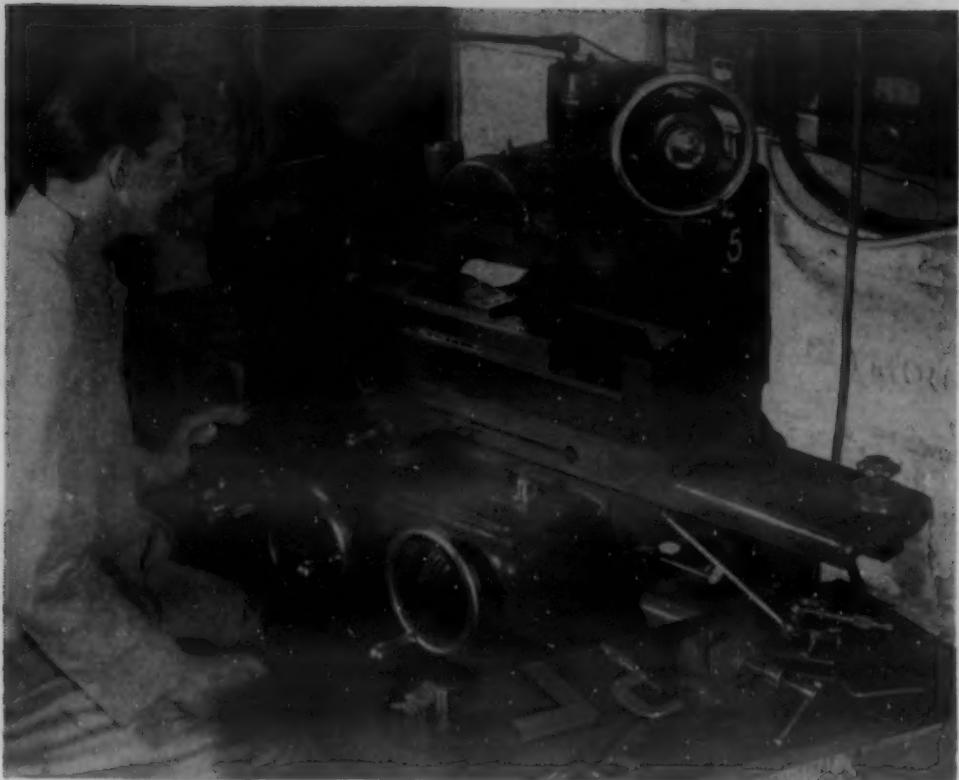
A small horizontal spindle surface grinder used for accurate work. (Courtesy: H. J. Chamberland)
